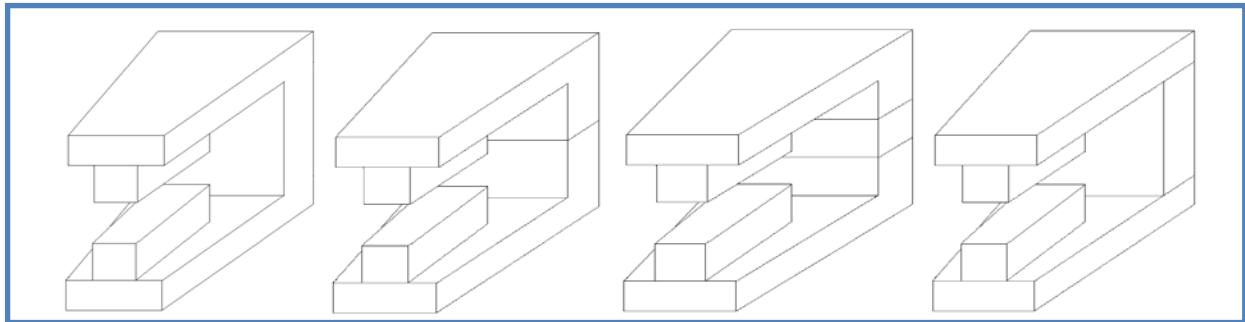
Stator Segments: Assembly Options (Solid, Two Halves, Two Plates, Hoop)
